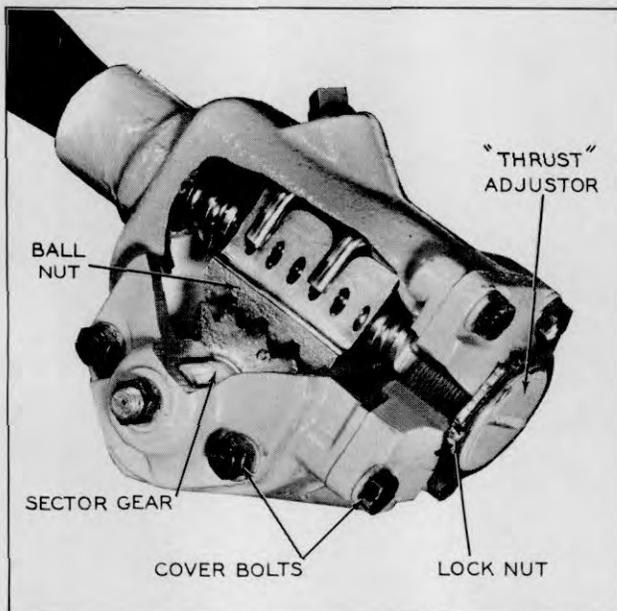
Steering Gear Thrust Adjustment (Worm Bearings)
